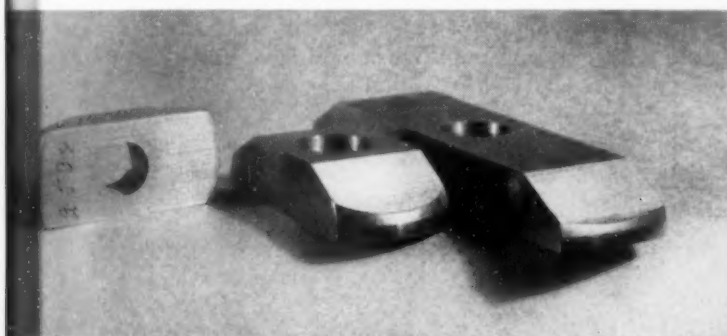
Paddle-type plug gages with gaging surfaces wearproofed by Spray-welding.
